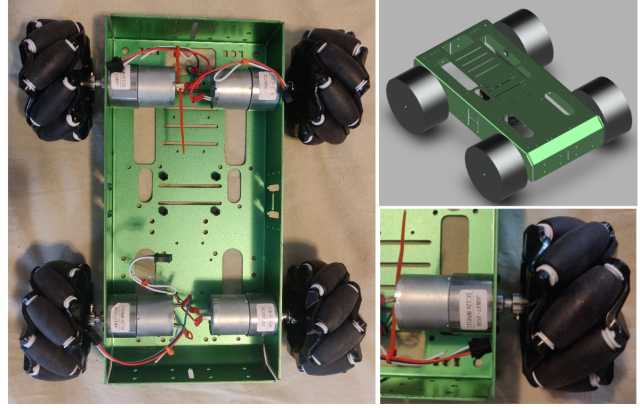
Overview of the robot platform chassis and wheel system. Figure on the left shows the complete robot chassis base with the mecanum wheels and motors attached and coupled with the aluminum frame. The top right figure shows the aluminum frame modeled on CAD software. The bottom right figure shows an individual mecanum wheel coupled to the 12V DC motor.
